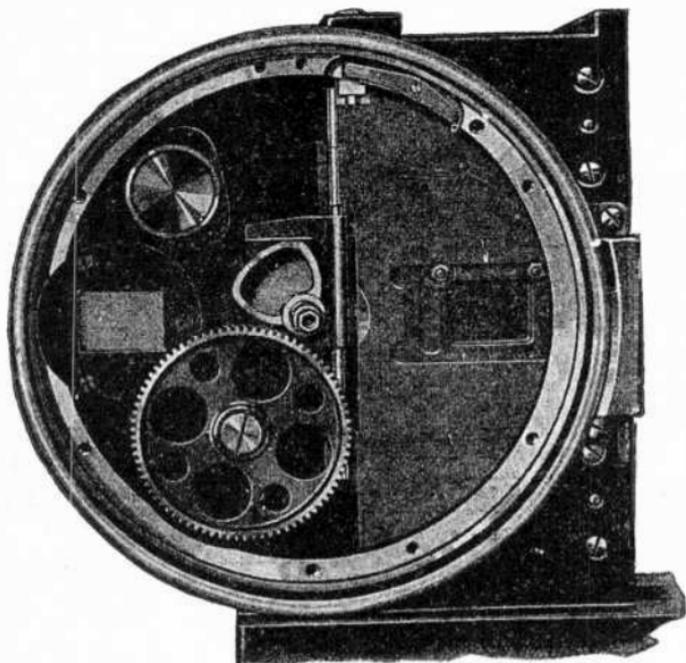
, '89.—Bell & Howell camera. Front view with turret plate and shutter removed showing focusing and photographing apertures; shuttle operating cam, part of brake mechanism and opening for mounting focusing magnifier above focusing aperture.
